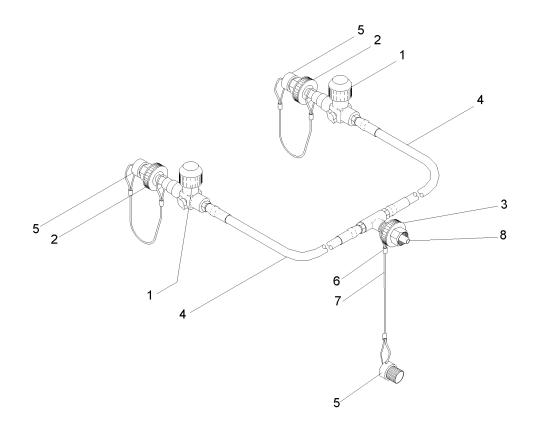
Filtered Air Supply Hose Assembly (H-103)
